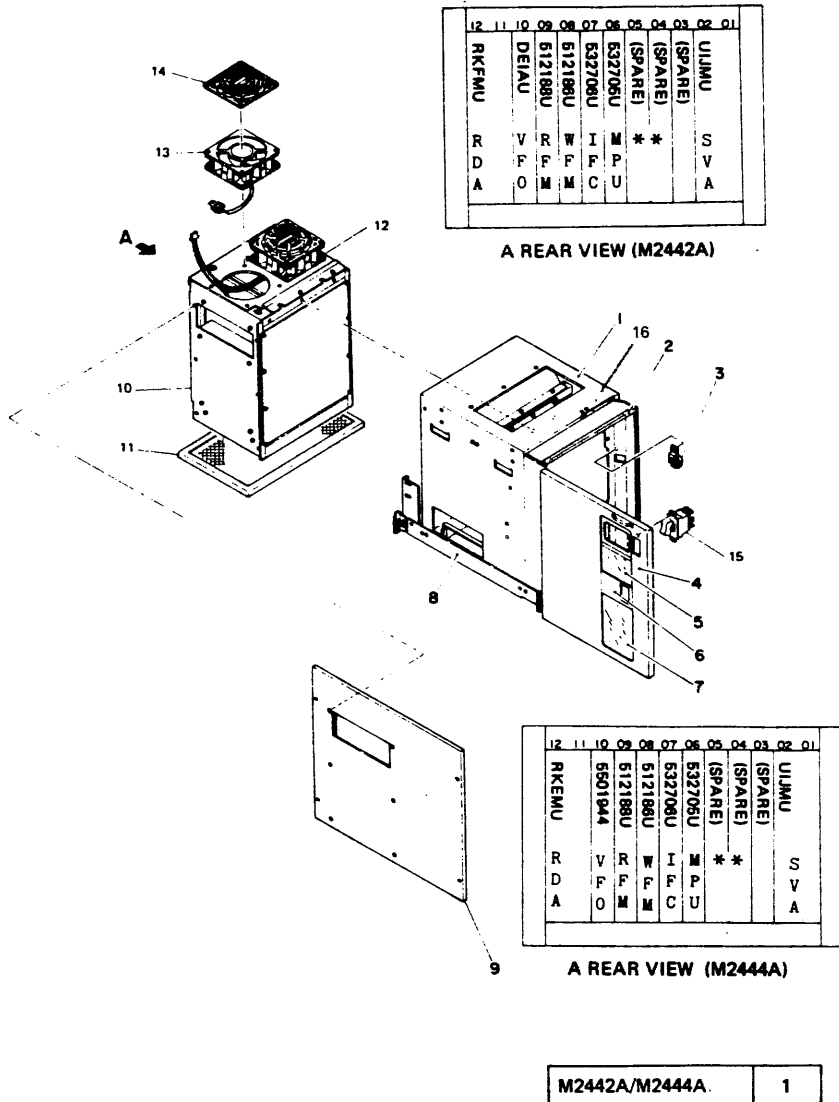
CABINET & PCB RACK SECTION (M2442A/M2444A)
